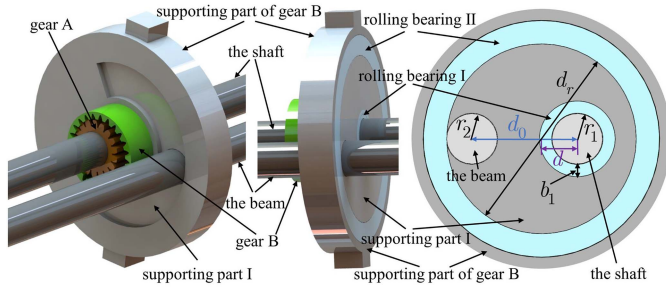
Example of the mechanical design (from two perspectives) and the geometry. The left side showing the meshing gears. The right side showing the supporting of the gears with the geometry.
